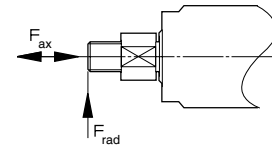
Load on output shaft for basic motor with threaded shaft.
